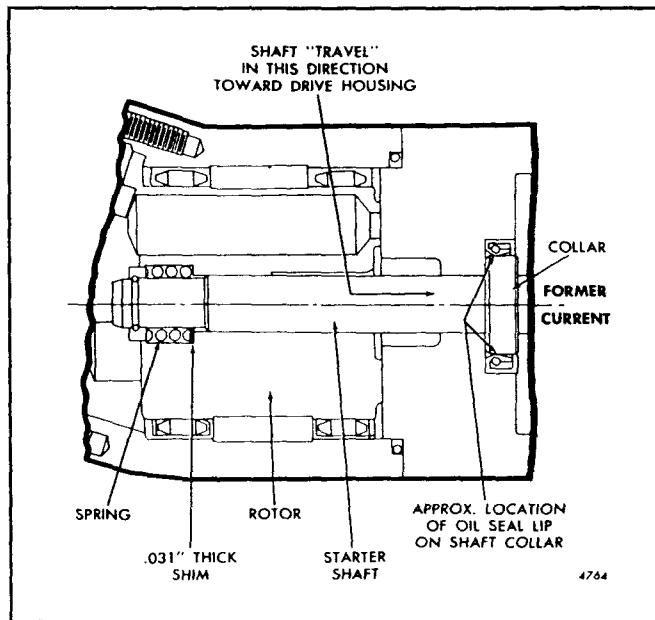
Location of Starter Shaft Compression Spring Shim(s)
